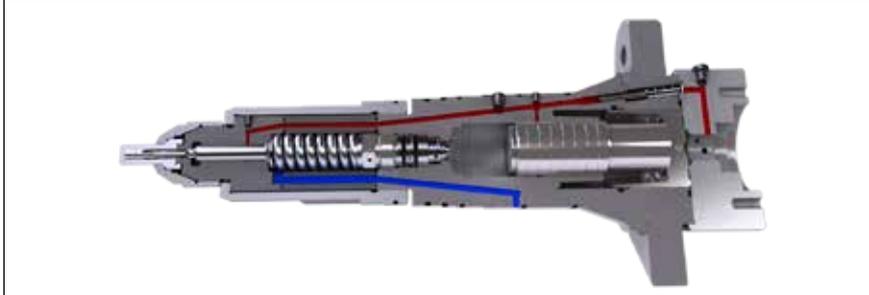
The methanol booster injector with cooling oil (blue) and sealing oil (red) supply fully integrated
